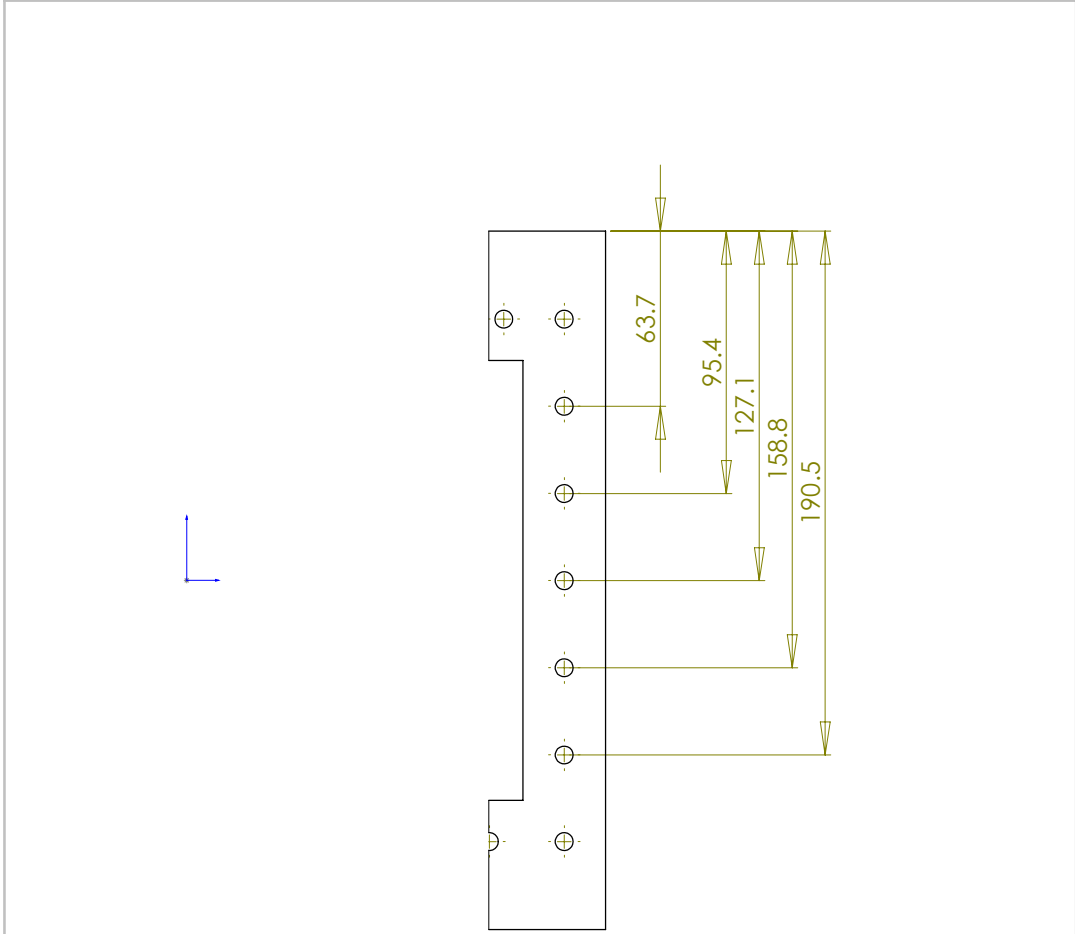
Mark I polypropylene base technical drawing page 1.
